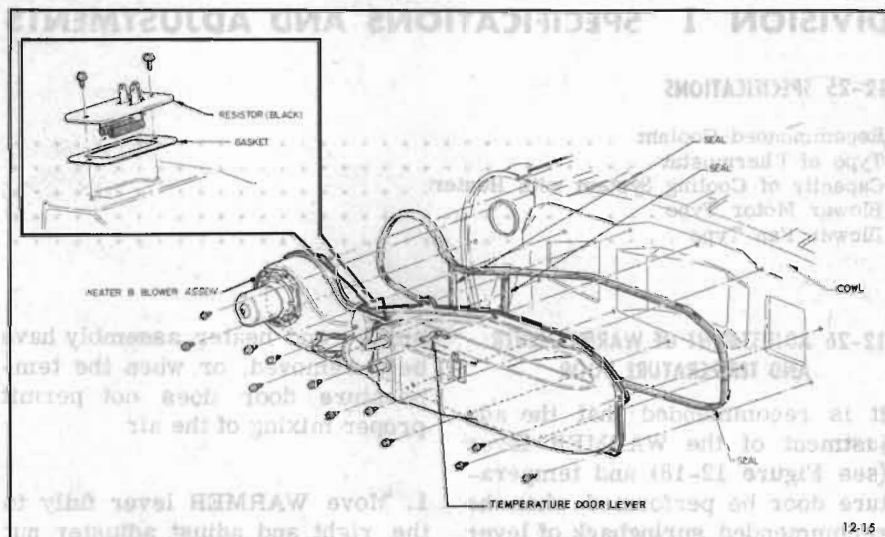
Blower and Heater Assembly Installation (49000 Series)
